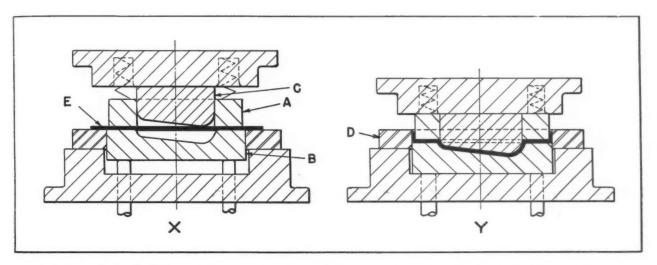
Once Blanked, a Part Sometimes can be Formed by a Combination Drawing and Flanging Die. The Action of This Die is Such that the Flange is Formed by Ring D after the Center Pocket of the Part has been Drawn. The Position of the Sheet before the Draw is Shown at X, while the Completed Action is Shown at Y
